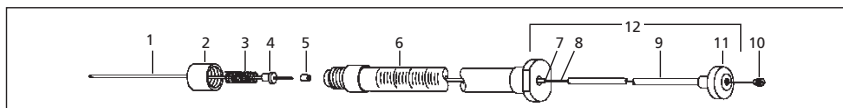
Exploded view of plunger-in-needle NanoVolume syringe
